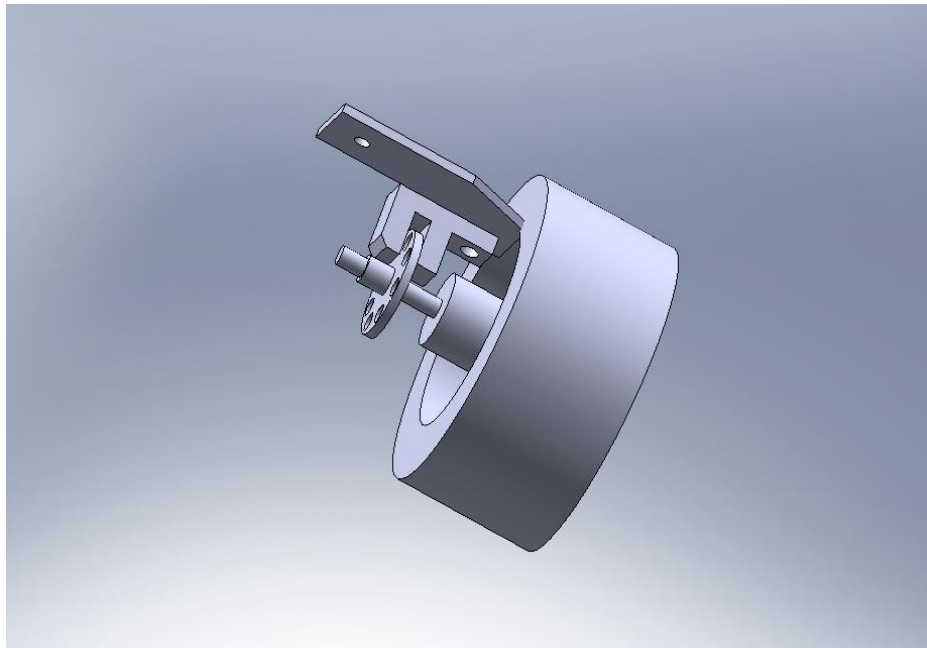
Encoder assembly with wheel and axle. The encoder wheel rotates with rotation of the wheel shaft, and is straddled by the photo-transistor pair.
